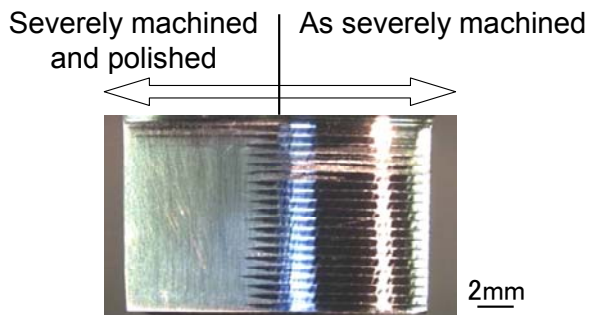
Optical micrograph of specimen surface after severe machining.
